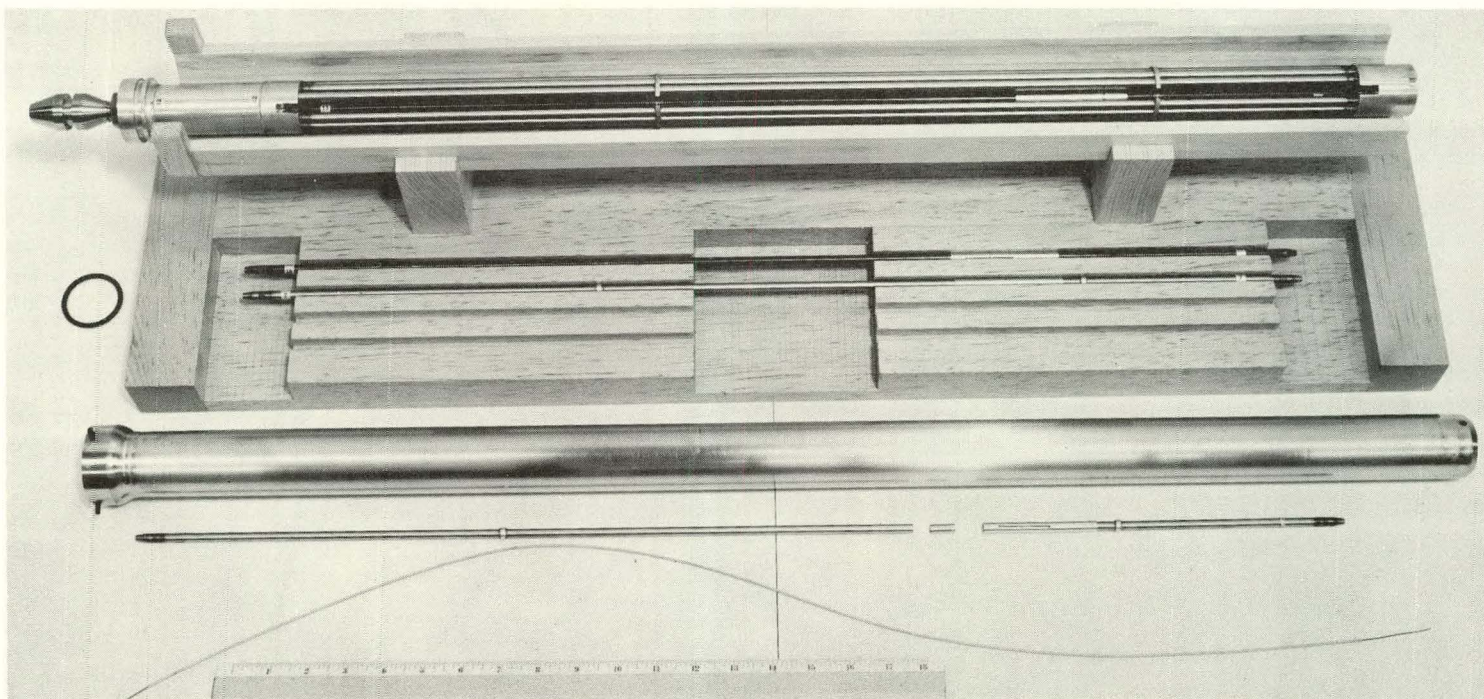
IB-9Ø R-2 FLUX MEASURING ELEMENT, FULLY DISASSEMBLED, ON ASSEMBLY JIG
